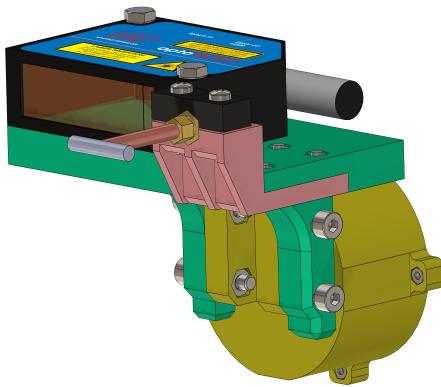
3D model image of the new robot tool design with antenna and laser distance sensor mounted. The tool consists of three separate parts: base (yellow), platform (green) and receiver holder (pink).
